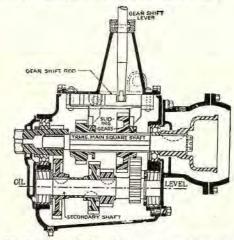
Sectional view of a transmission. Note the oillevel line.
